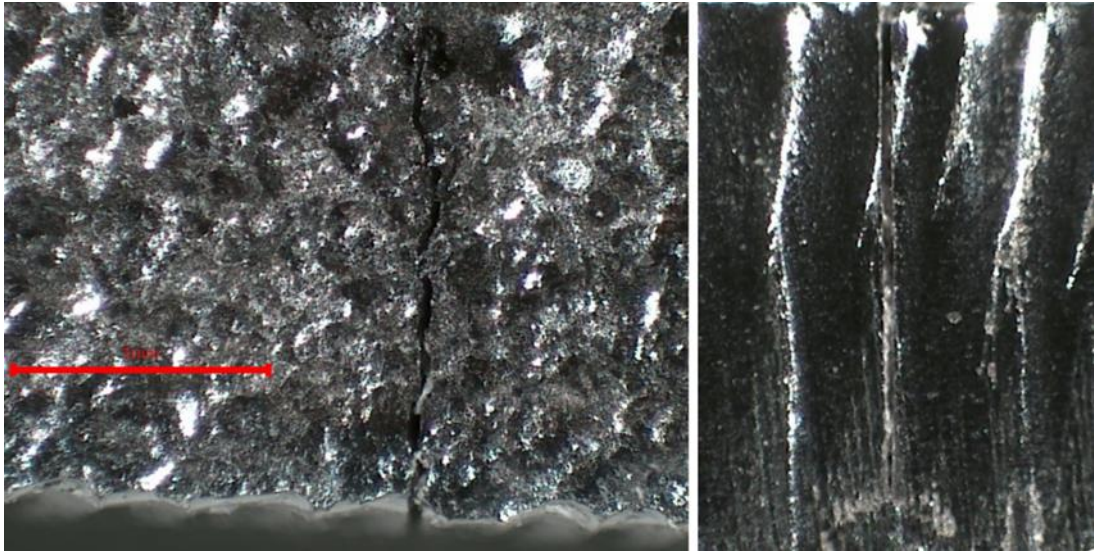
Fatigue crack on LC5-5 specimen.
